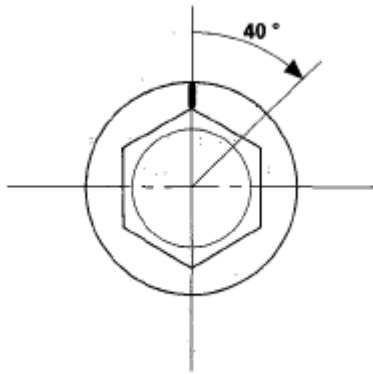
Tightening Bearing Cap Bolts Additional 40°
